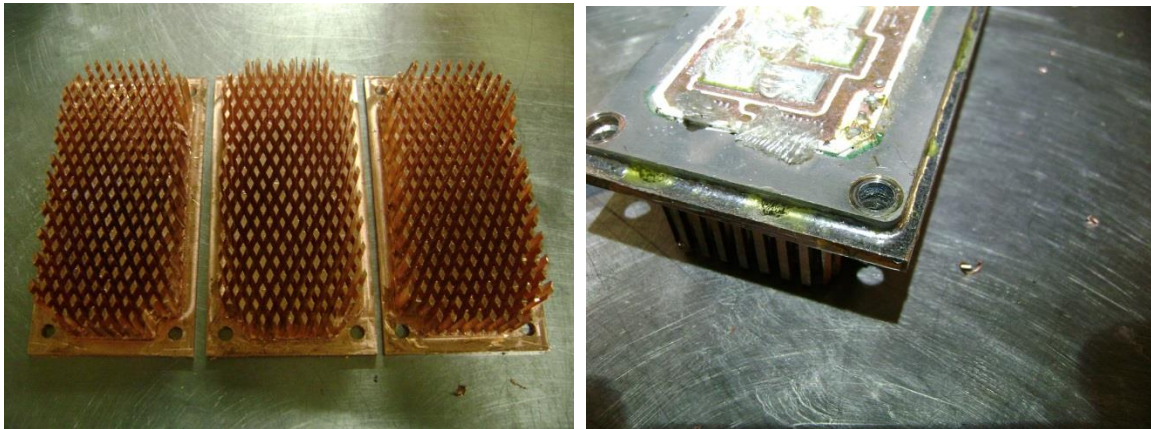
Diamond pin-fins (left) IGBT module soldered to heatsink (right)
